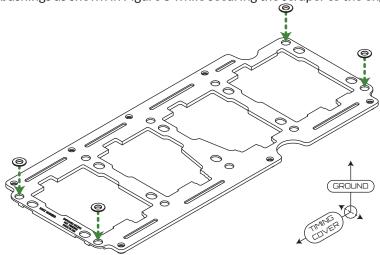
Inserting the Reducer Bushings for Factory Main Studs
